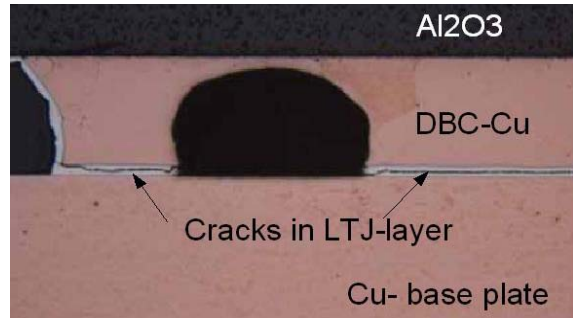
Cross-section of the sample edge with about 25 µm LTJ-layer thickness
